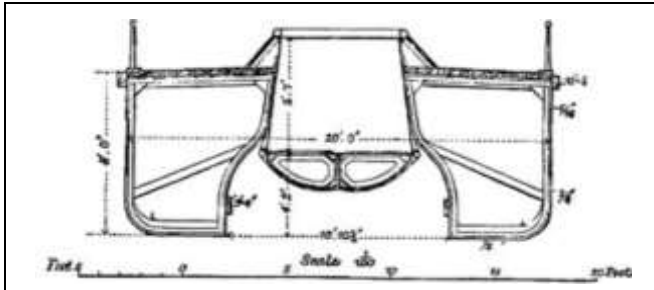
Section through a bottom-dumping barge for concrete-filled jute bags
